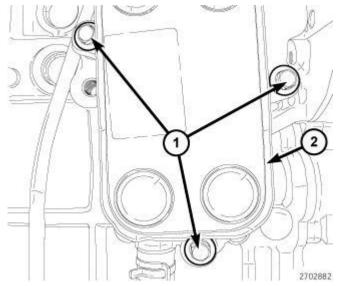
OIL FILTER HOUSING ADAPTER & BOLTS Courtesy of CHRYSLER LLC
